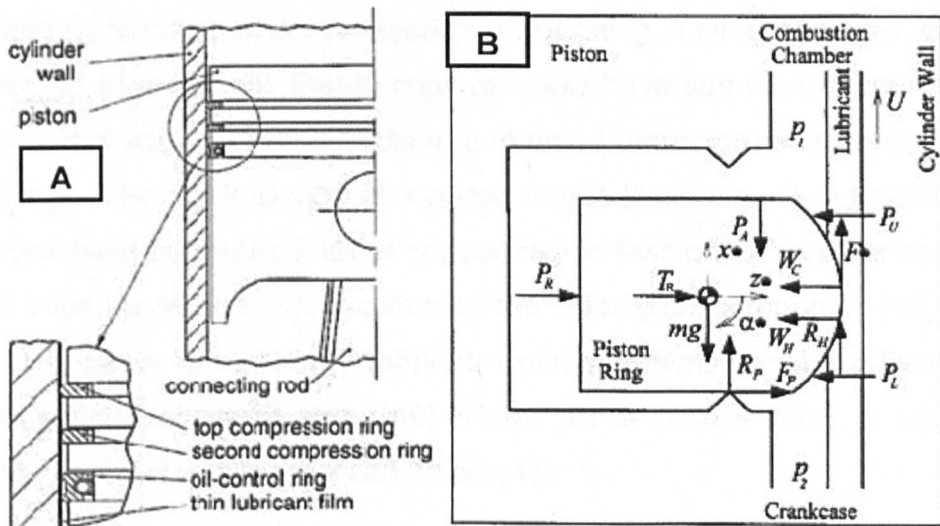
The piston assembly (A) [45] and forces acting on a piston ring [52] (B)
